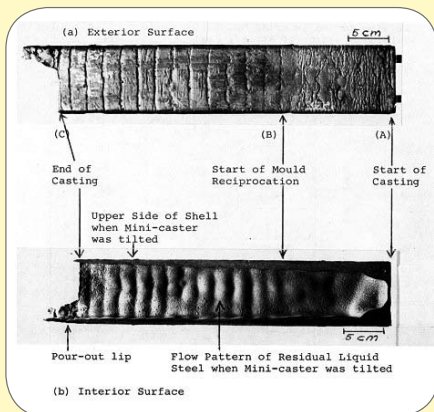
External and internal surfaces of a 0,17 % C-steel billet cast with mould oscillation [5,6].
